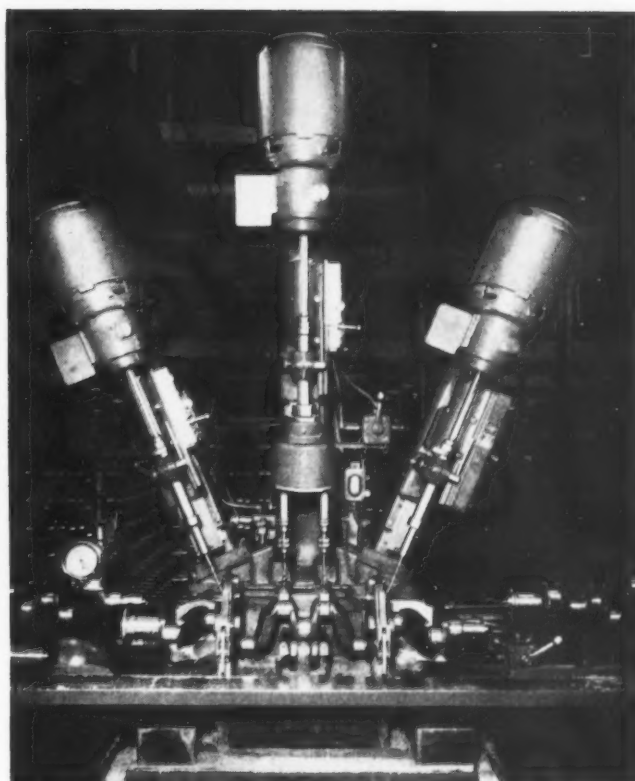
One of a Battery of Six Machines which Drill a Total of Seventeen Oil-holes in Buick Crankshafts
